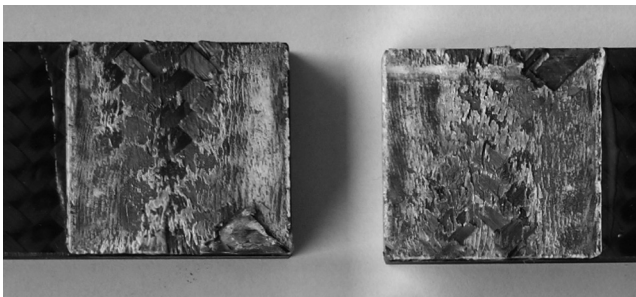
Fracture surface of a LS 25.4 joint.
